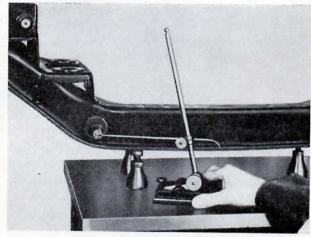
Checking the height of the lower fulcrum shaft centre with a surface gauge
